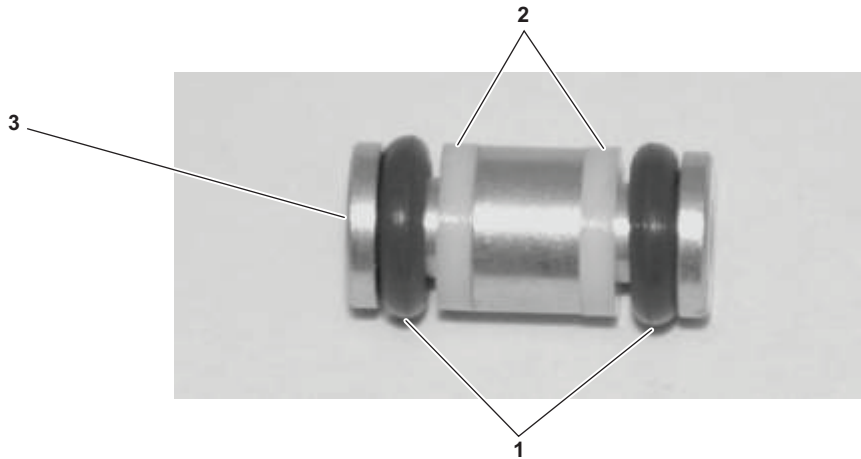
Mounting Probe Preformed Packing and Packing Retainers
